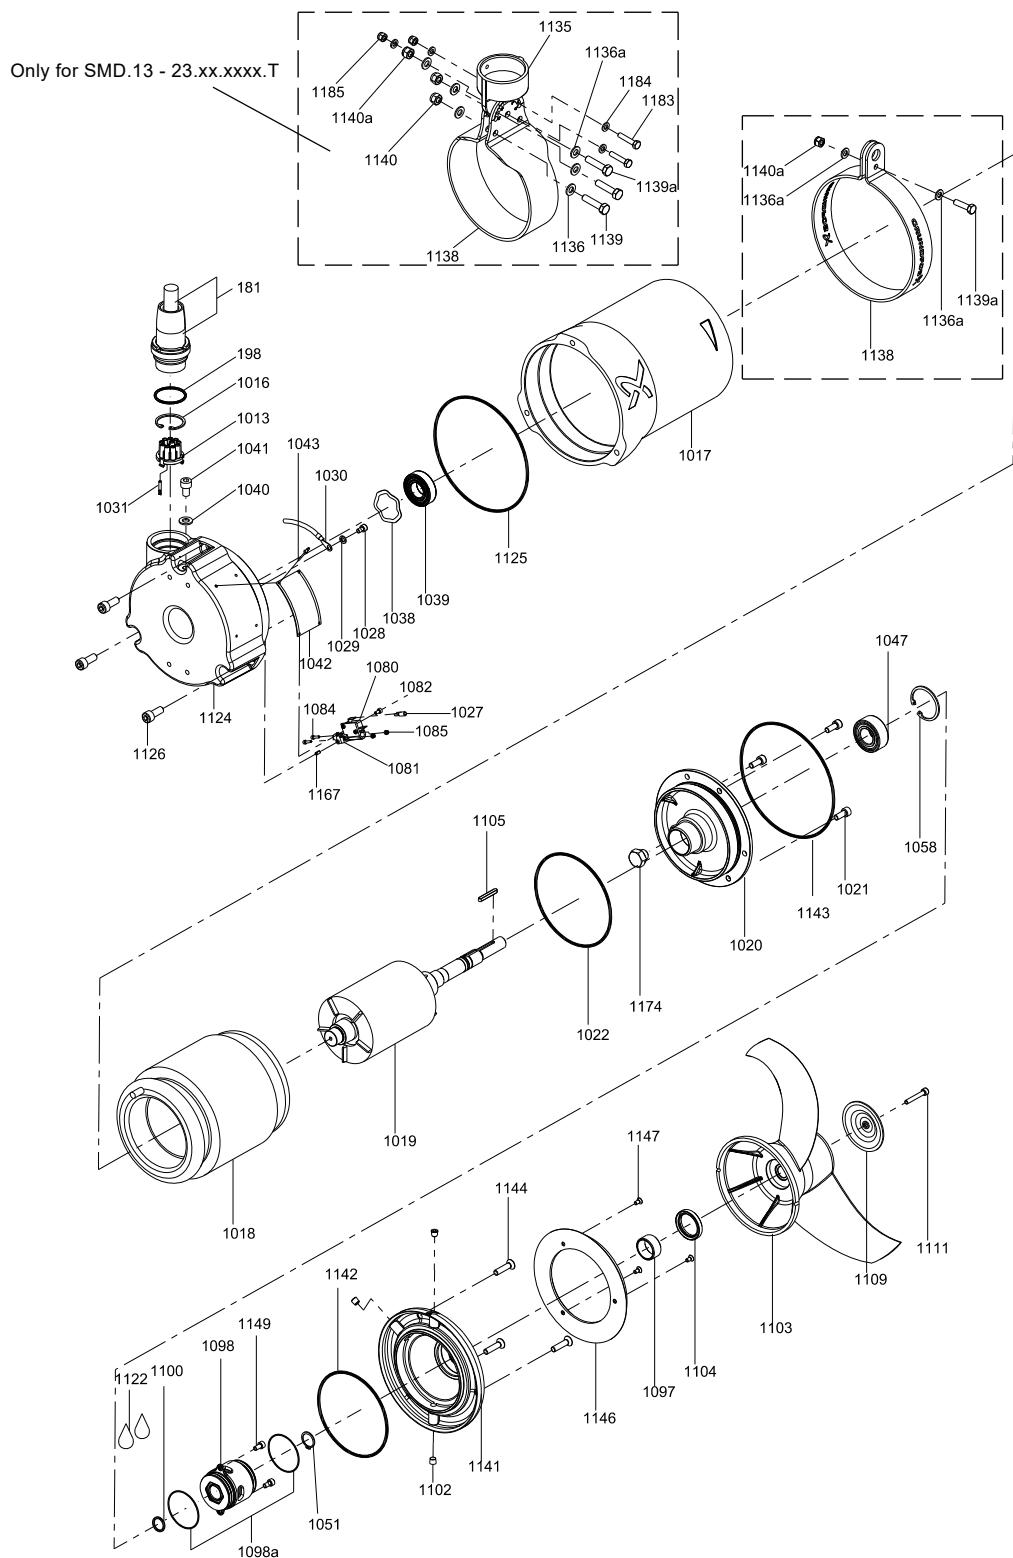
Exploded view, SMD.13.xx to SMD.47.xx
